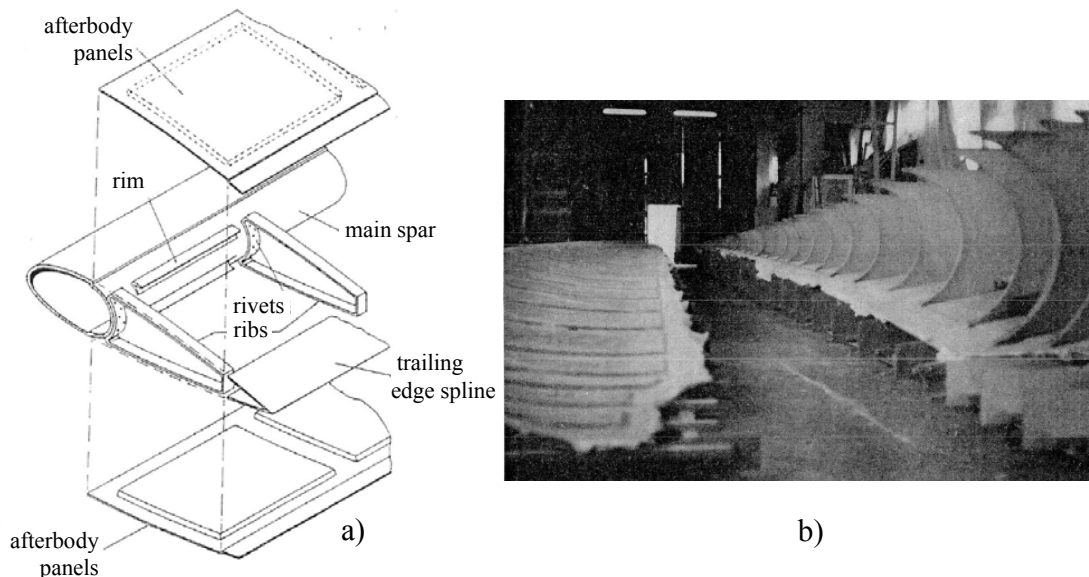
The AWEC-60 wind turbine blades. a) exploded view showing structural details [21], b) trailing edge components ready for assembly onto spar [32].
